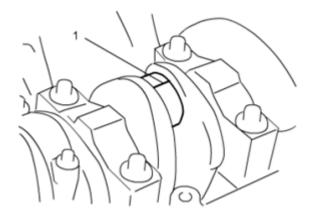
Placing Piece Of Gauging Plastic Courtesy of SUZUKI OF AMERICA CORP.
